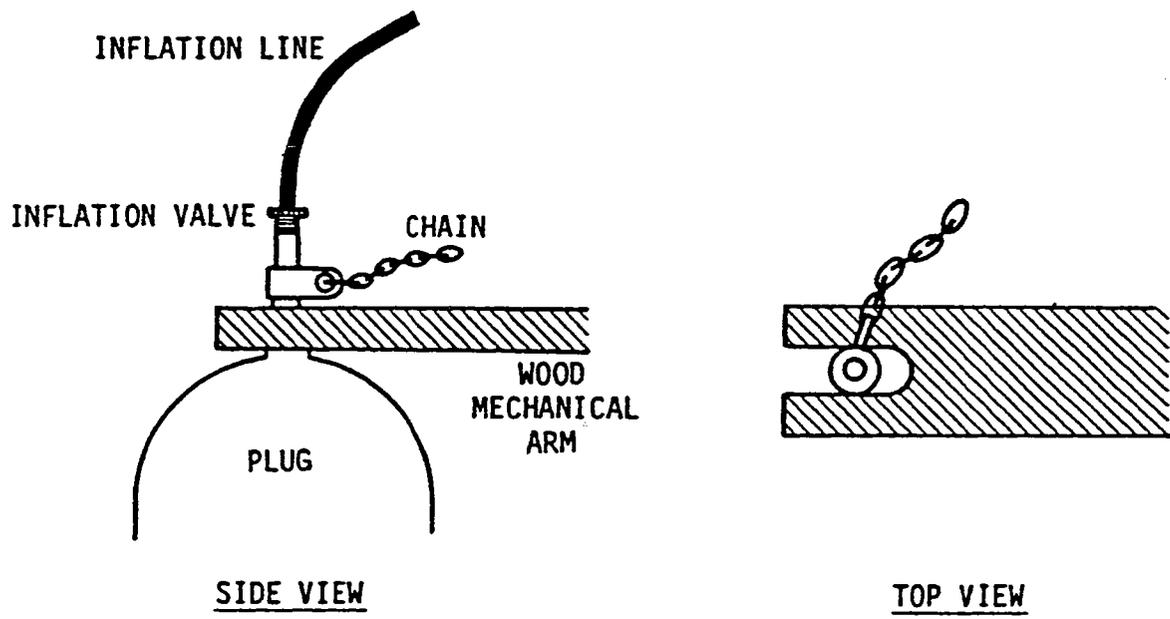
Enlarged view of plug, chain, and mechanical placement arm.⁶
